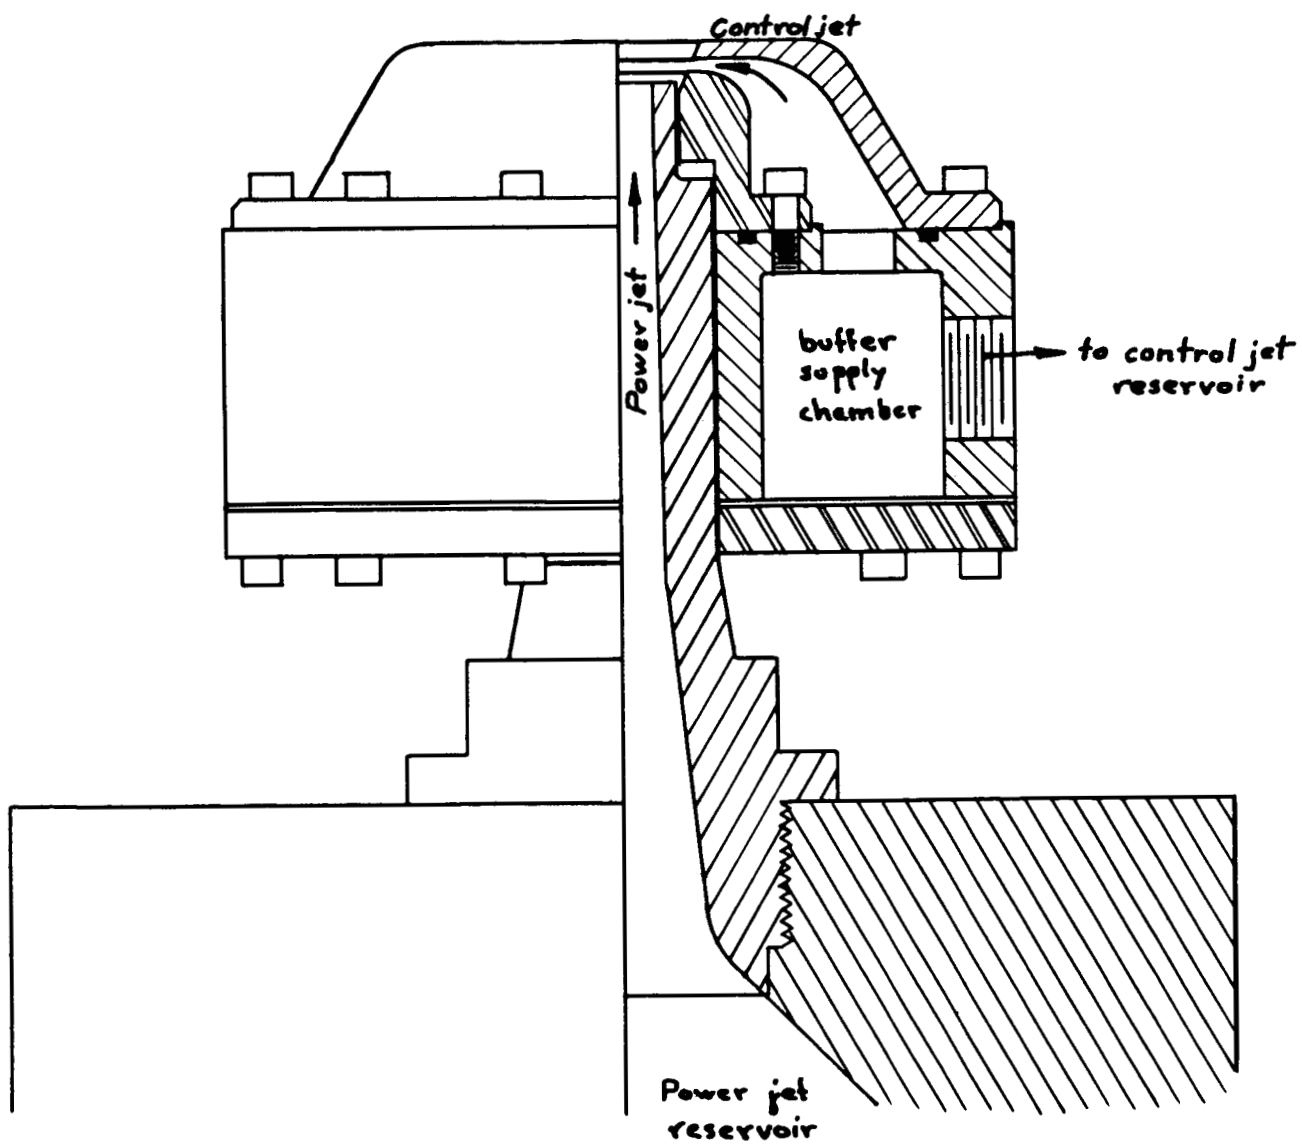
POWER AND CONTROL JET NOZZLE ASSEMBLY
